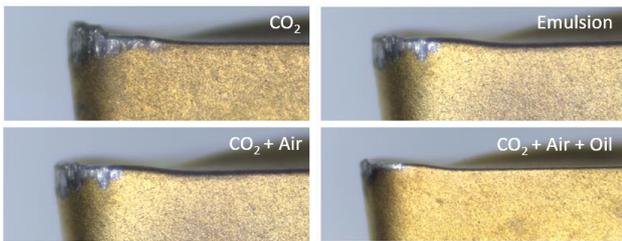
Flank view of the investigated cutting inserts by microscopy after machining for 22 min of SS 316LN under 100 % CO₂, emulsion, 100 % CO₂ + 2.5 bar air and 100 % CO₂ + 2.5 bar air + 2.6 bar oil cooling
